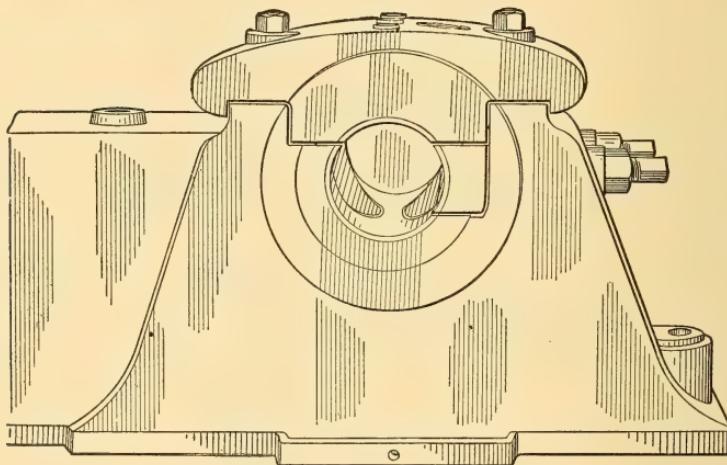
Three Part Main Bearing with Screw Adjustment.
